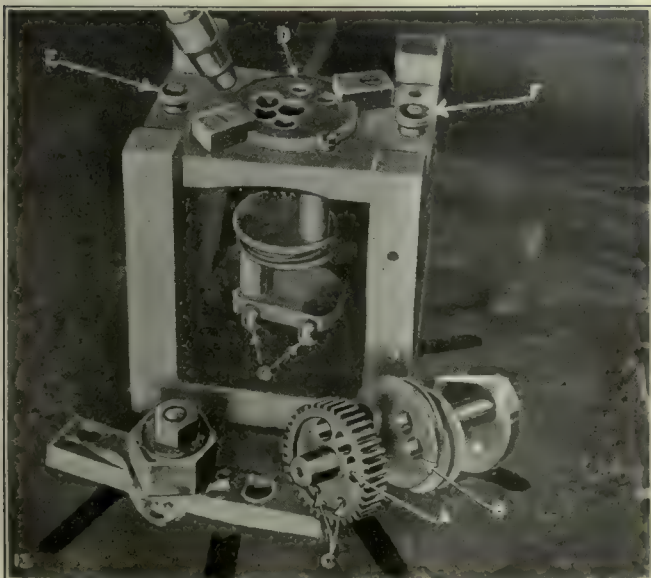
DRILLING COUNTERWEIGHT RIVET AND "LIGHTENING" HOLES. FIG. 14—FACING CHEEKS AND ROUGHING OUT CRANKPINS
